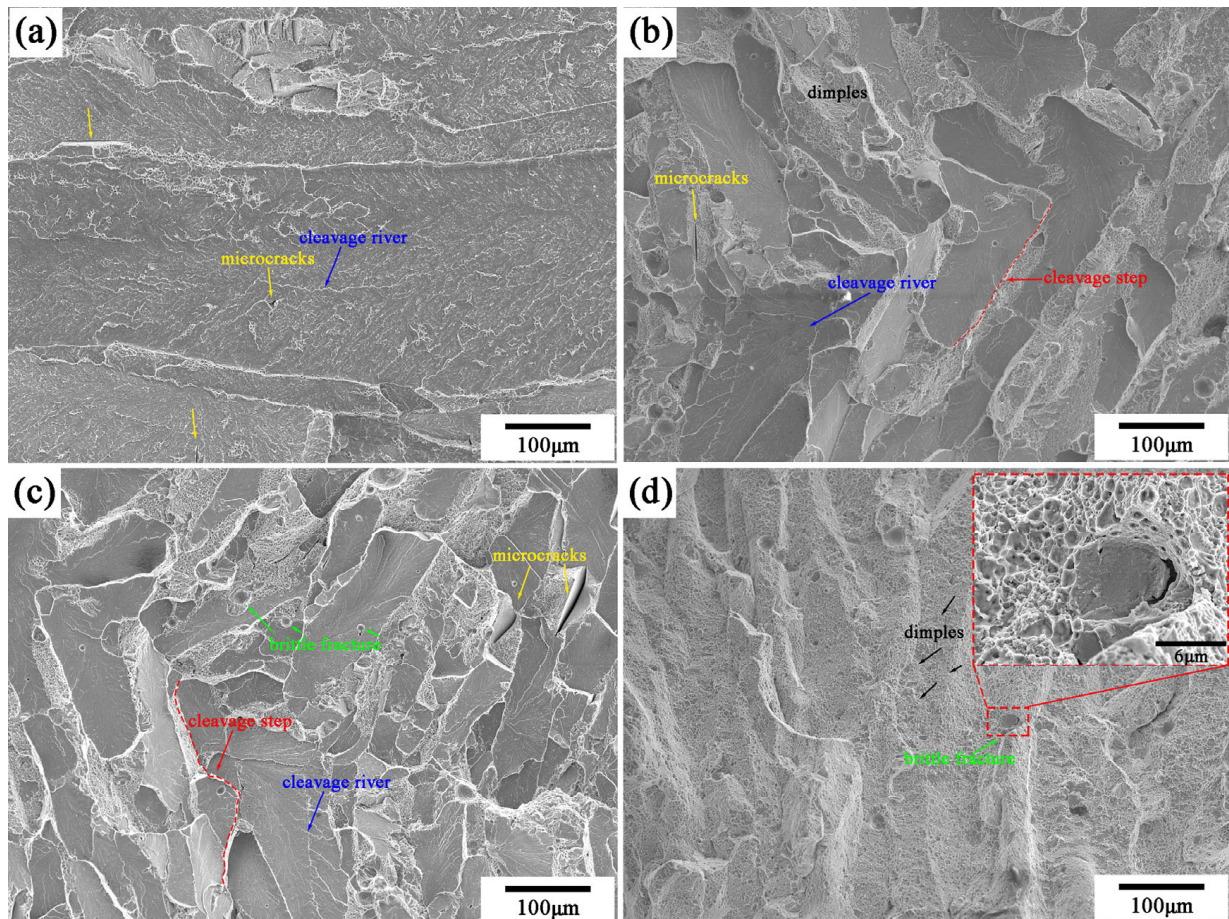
Tensile fracture morphology: (a) as-printed sample at 25 °C; (b) HIPed sample at 25 °C; (c) as-printed sample at 300 °C; (d) HIPed sample at 300 °C.
